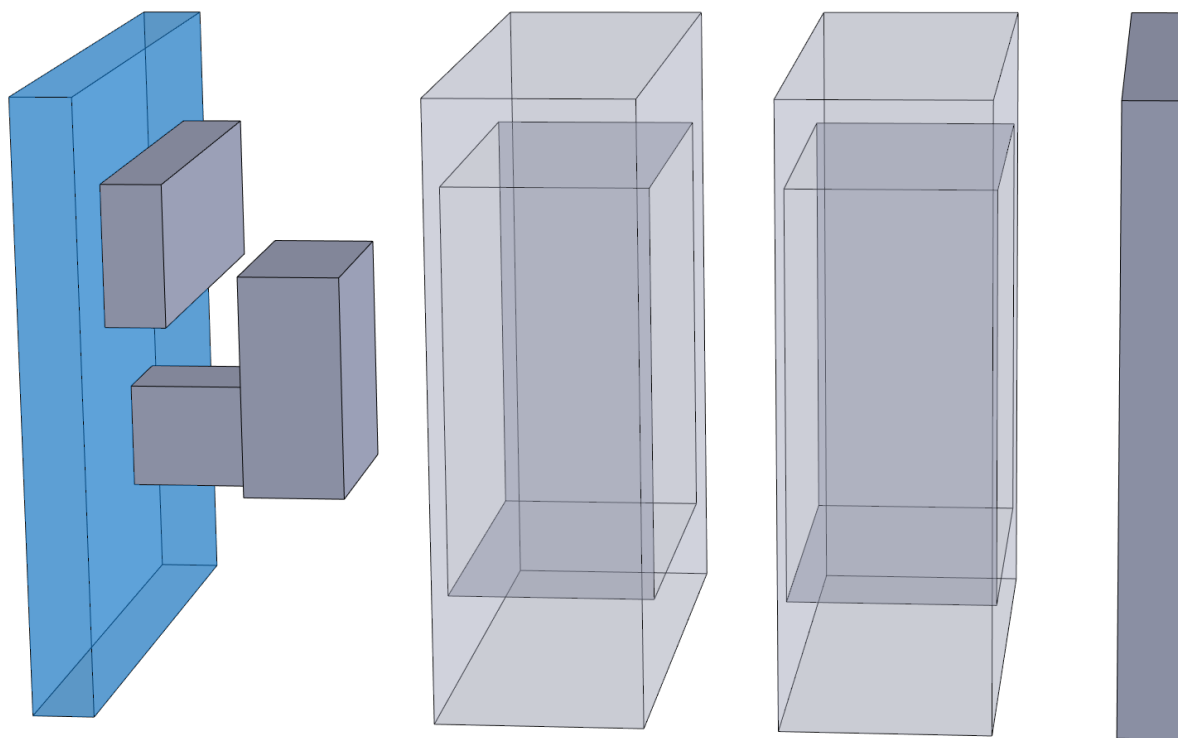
S8: 3D printed mold for creating soft actuator modules. The mold parts are 3D-printed using PLA. The cover, indicated in blue, is made of PMMA.
